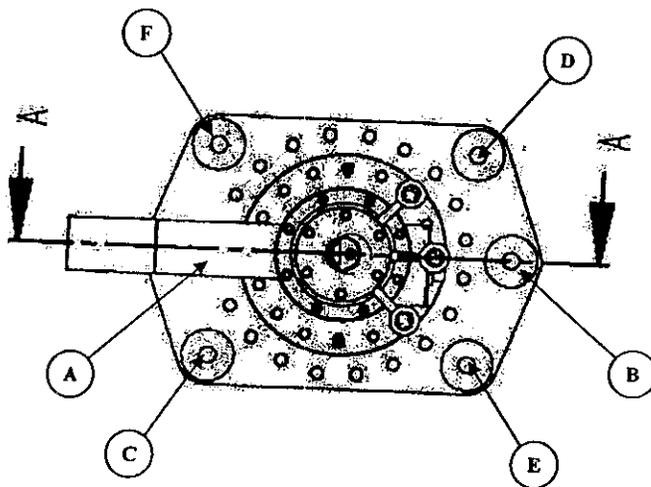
The specified sequence for tightening the Belleville washer assemblies.
